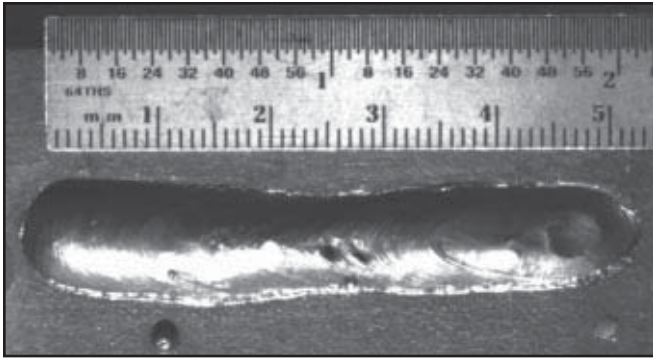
Weld bead after constant voltage weld over 0.15-mm paint contamination.
